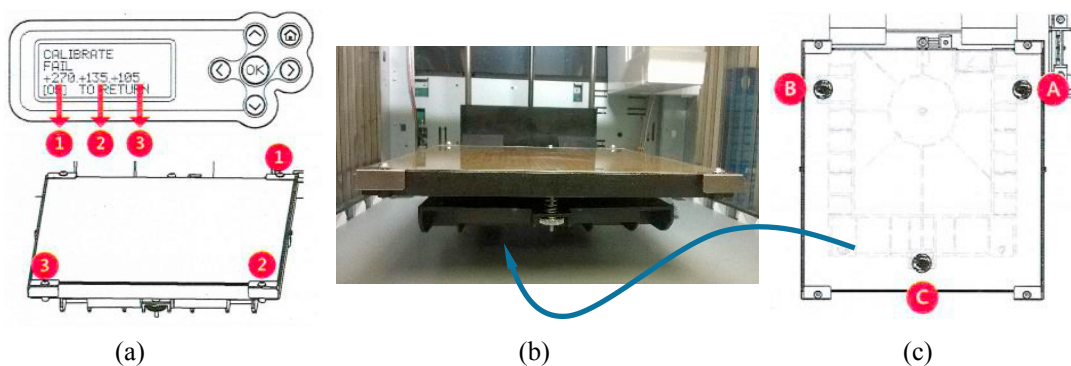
(a) reading points; (b) real platform showing one of the set screw; (c) set points.
